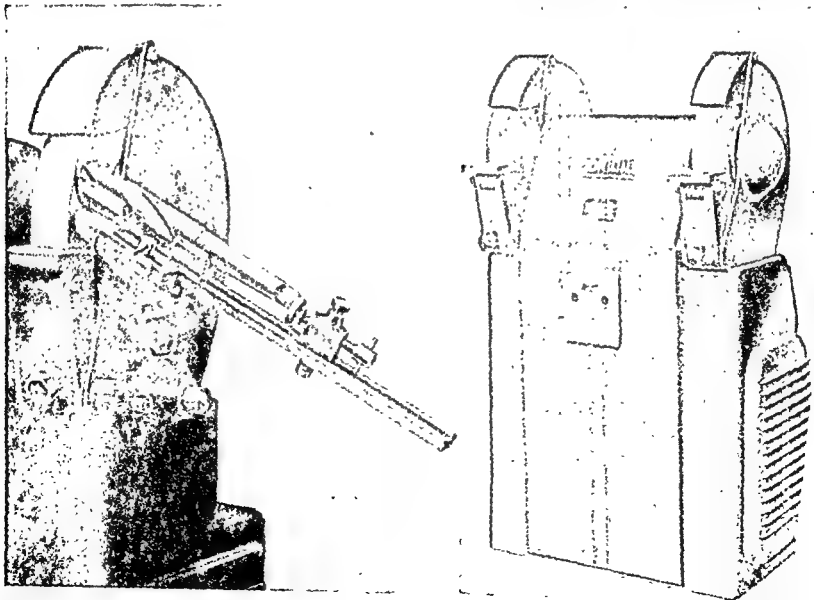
Pedestal Grinder with Enlarged Diagram of Drill Grinding Attachment.
